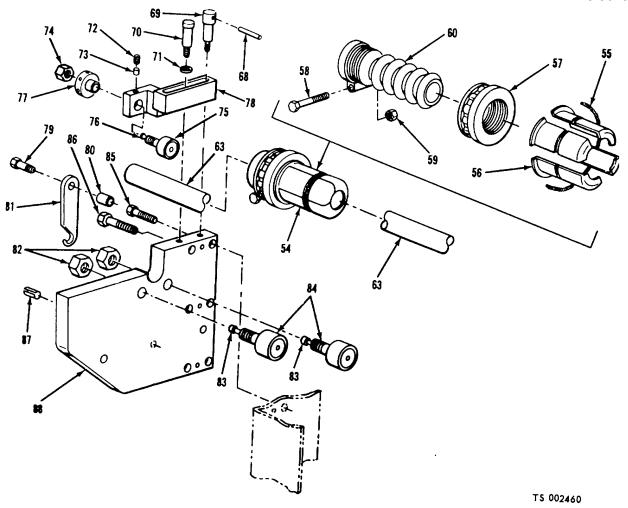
Feeder assembly (Sheet 2 of 5).
